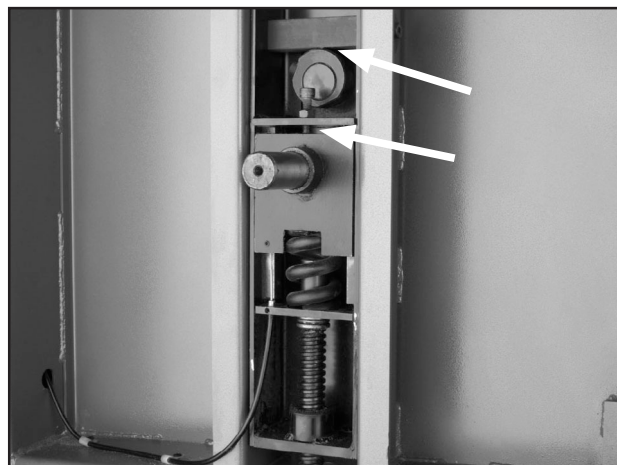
Tension adjustment assembly locations (top wheel removed for clarity).
